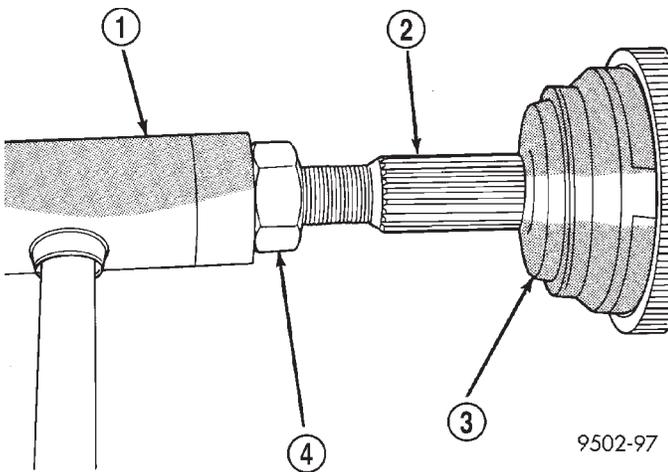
Outer C/V Joint Installation on Interconnecting Shaft
